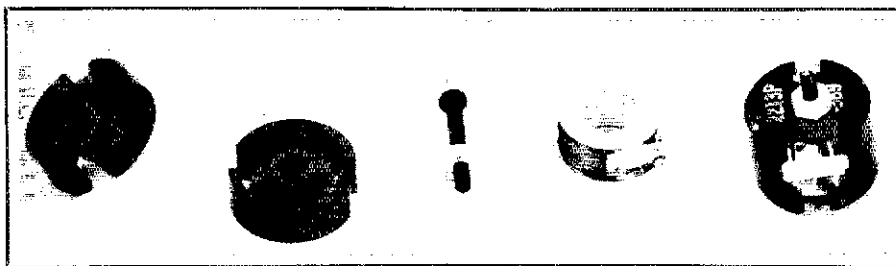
A pot-core or cup-core assembly. To the left is a break-down view of the core halves and the insulating bobbin that contains the coil winding. The unit at the right is a completed pot-core coil with the core halves bolted together.
